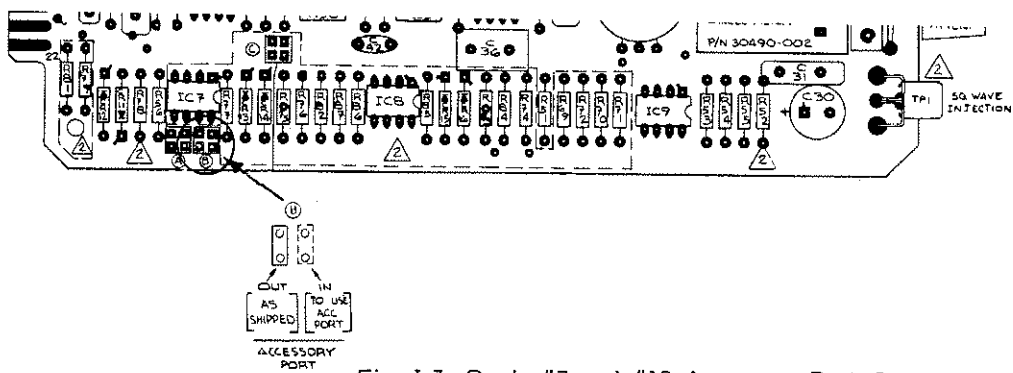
Cards #7 and #10 Accessory Port Jumper
